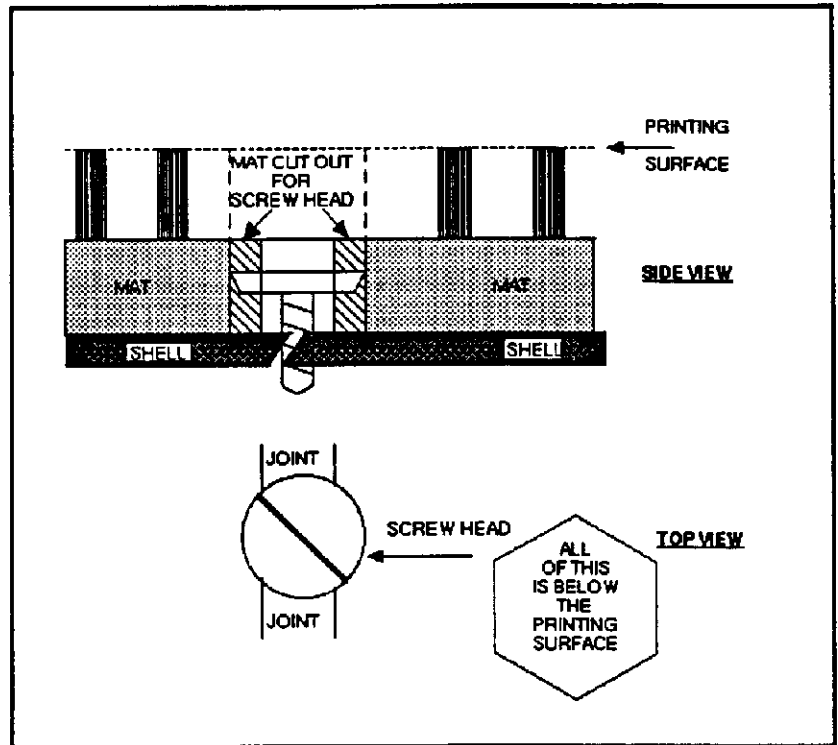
An unshaved precancel mat, showing that the cutout for the screw head is below the printing surface.
